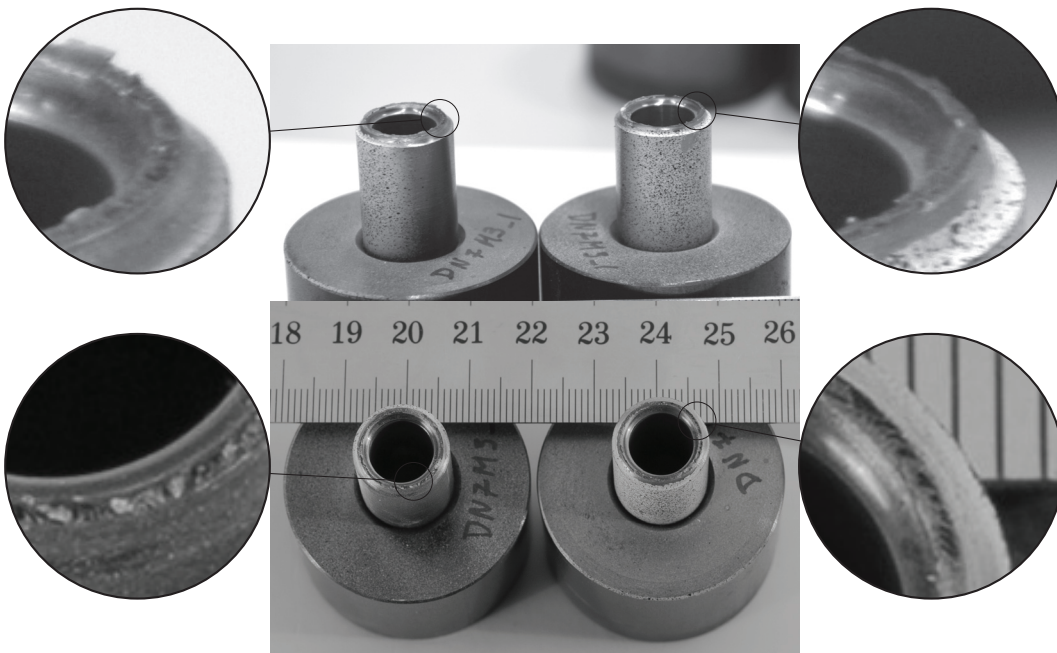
Fracture surface in monotonic load path 3 in double notched specimens
